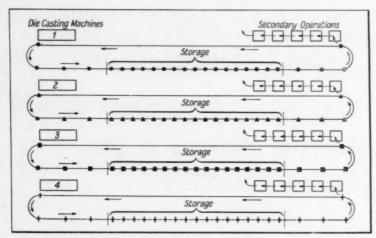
With this Layout, each Die Casting Machine has Its Individual Storage Conveyor and Associate Processing Line
